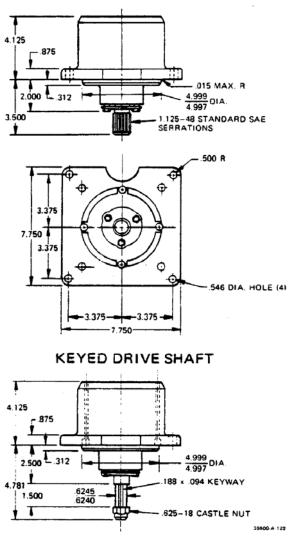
Outline Drawing of PG/UG-40 Base Assembly
